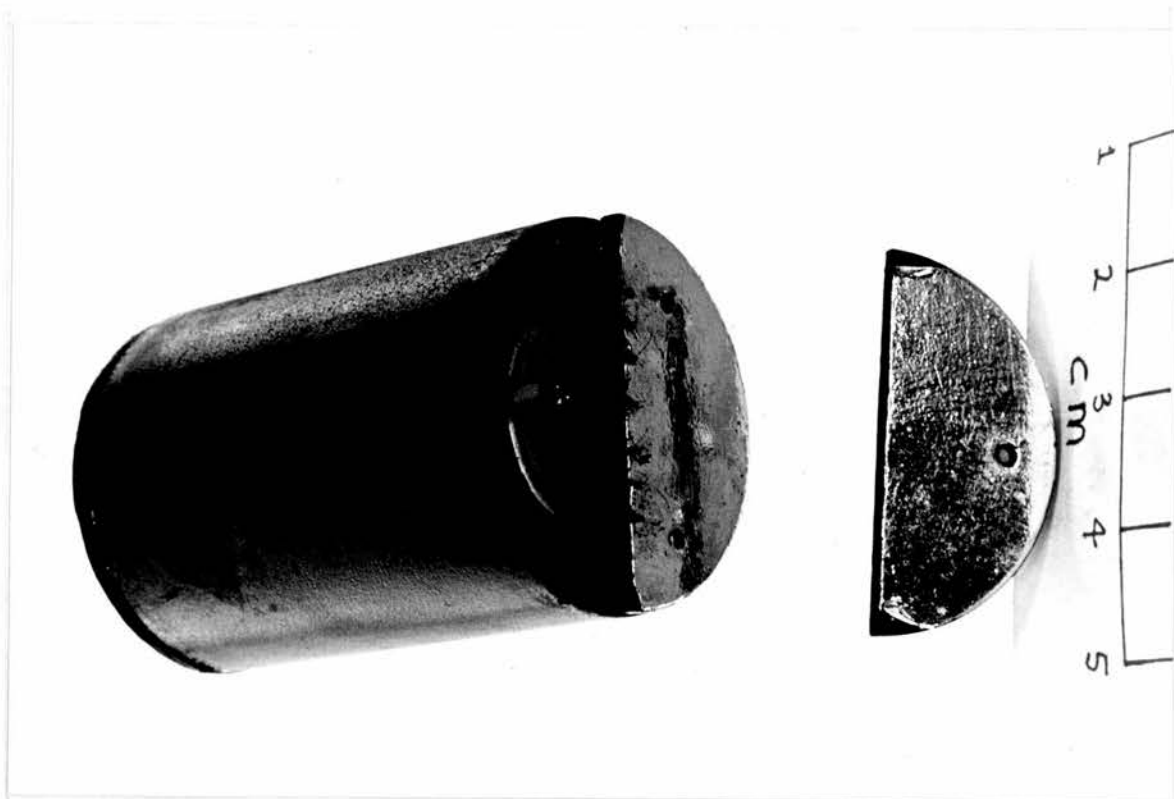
MANTLE ASSEMBLY WITH 1 DEE REMOVED
